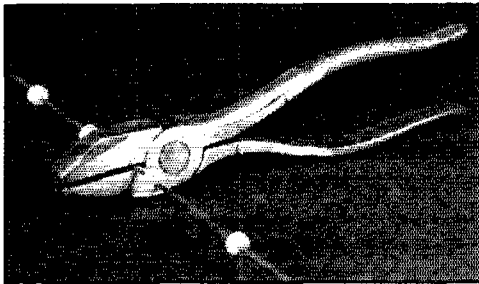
THE CRIMPING TOOL (REVAMPED PLIERS) READY TO TAKE A BITE
